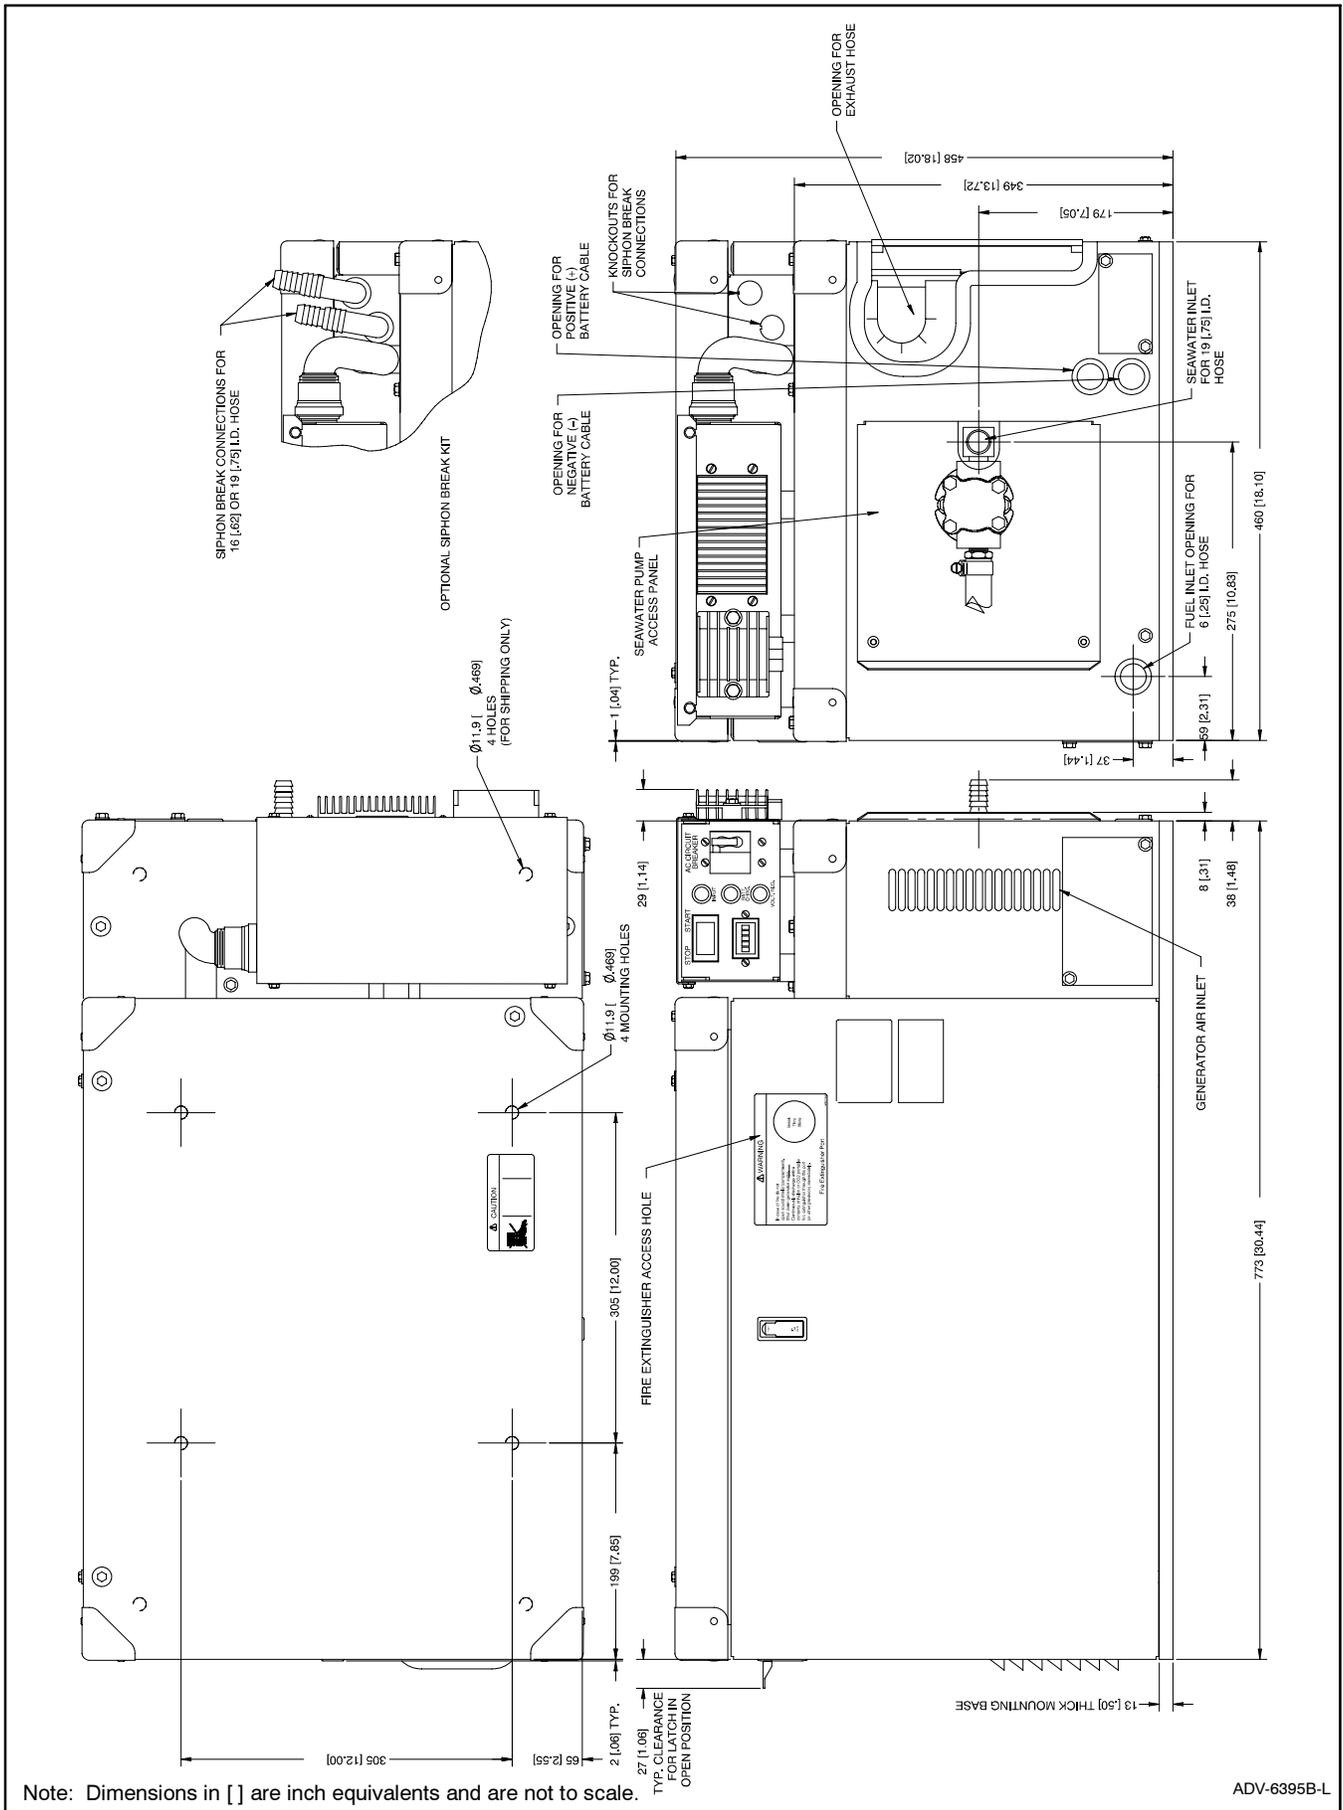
Dimension Drawing ADV-6395B-L, Sound Shield 5/7.3E and 4/6EF Models
